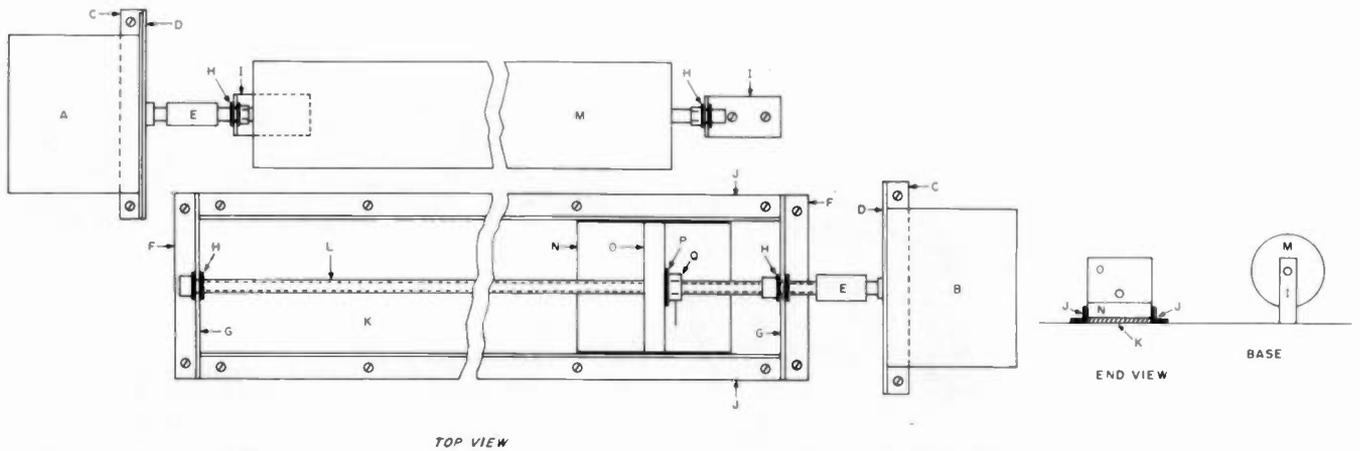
The facsimile recorder mechanical assembly. A—Drum motor; B—traverse motor; C—motor mounting plate angle bracket; D—motor mounting plate; E—rubber-tubing shaft coupling; F—drive-rod support plate angle bracket; G—drive-rod support plate; H—3/8" panel bushing; I—drum support bracket; J—carriage track bracket; K—glass-plate track surface; L—1/4-20 threaded drive rod; M—drum assembly; N—stylus-carriage base; O—stylus support; P—carriage-drive washer, and Q—1/4-20 carriage-drive nut.
